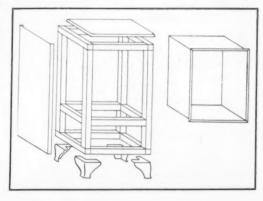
Sketch of 1932 Frigidaire in which the cabinet frame was all wood and no spot welding was employed.
